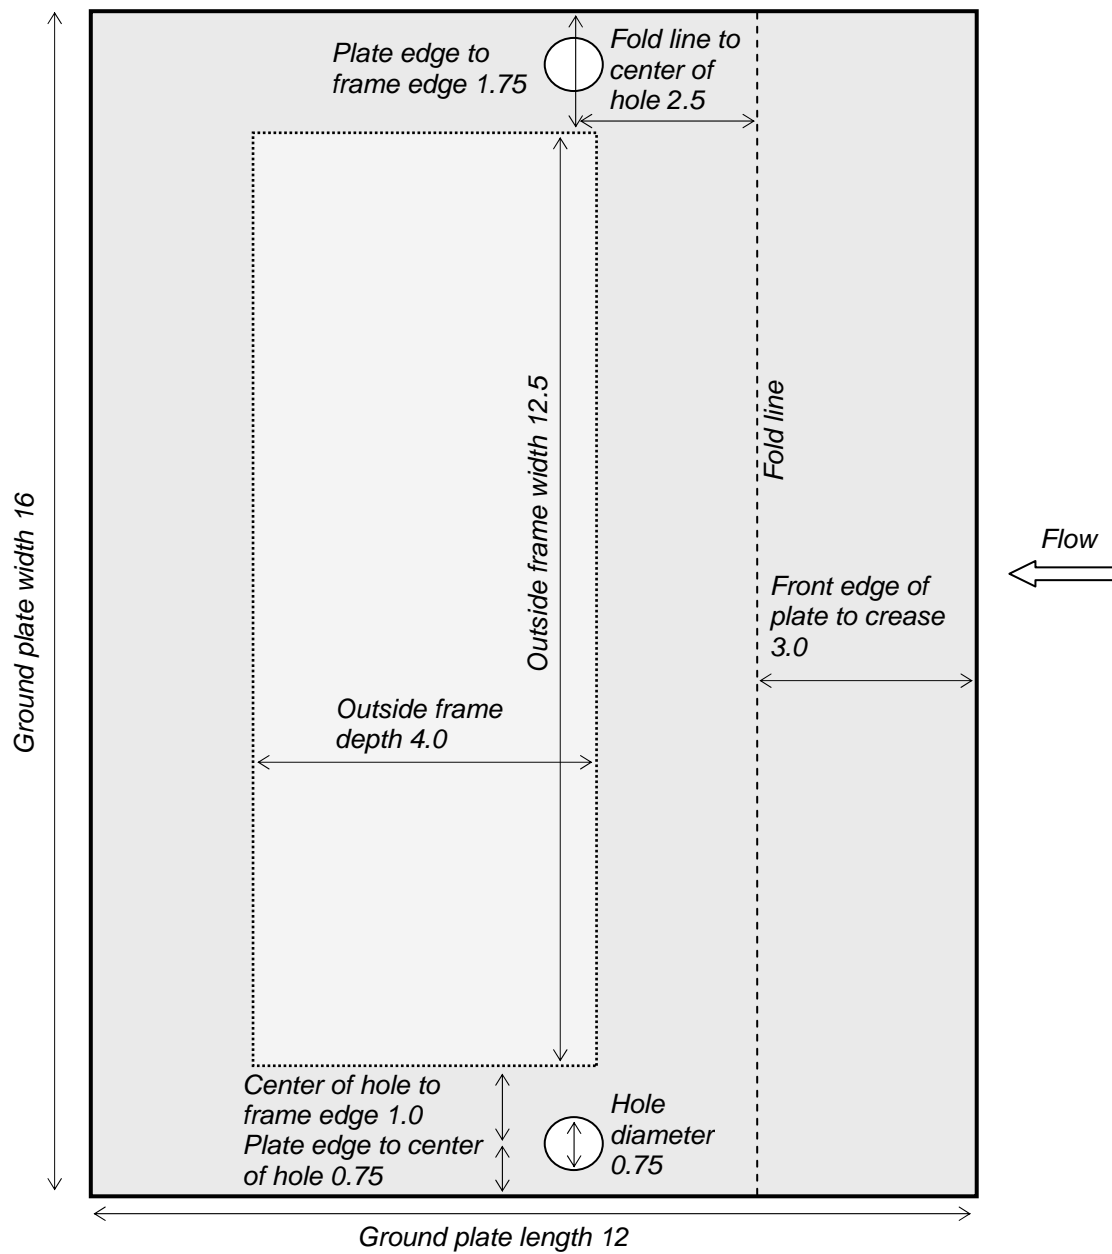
Top view of a ground plate and frame outline (dimensions in inches)
